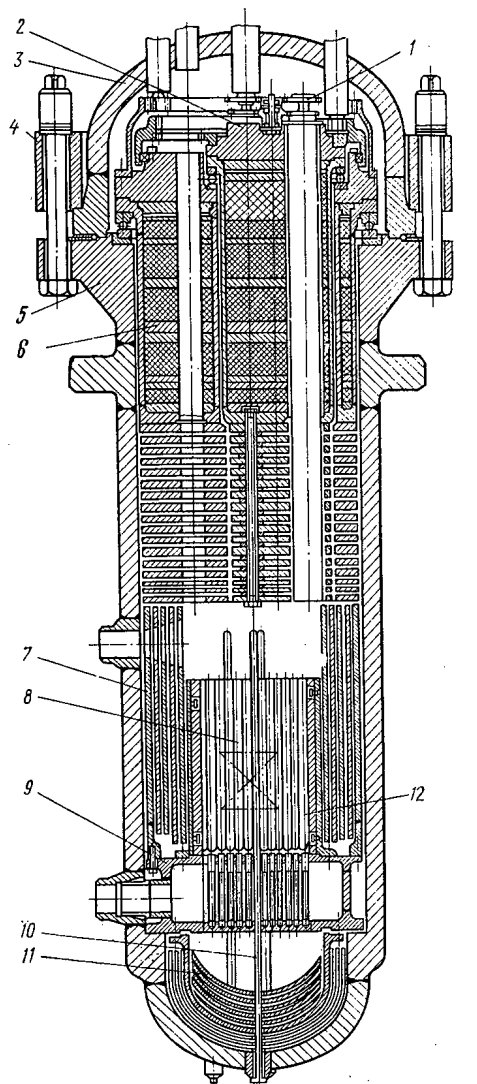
Longitudinal section through BRG-30 reactor: 1) refueling mechanism; 2) small rotating plug; 3) reactor cover; 4) bolted flange; 5) reactor pressure vessel; 6) large rotating plug; 7) side shield of pressure vessel; 8) fuel assembly; 9) header; 10) control rod assembly; 11) bottom shield; 12) shield assembly.
